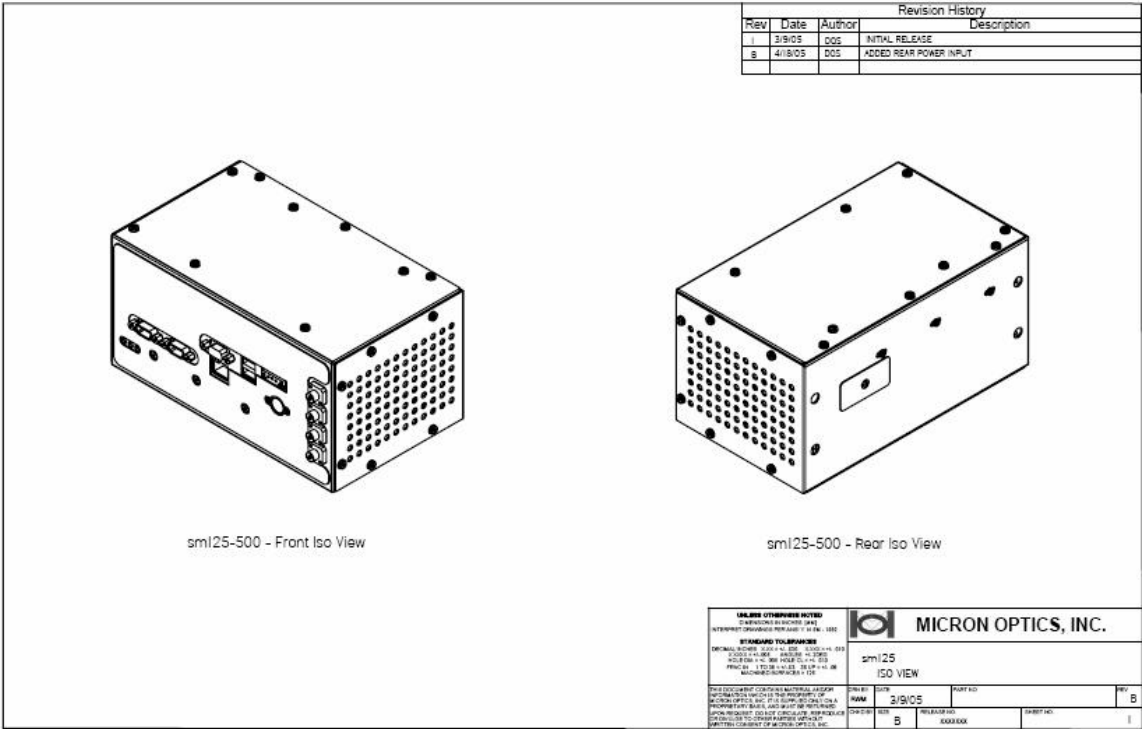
Mechanical drawings of the sm125 platform.
